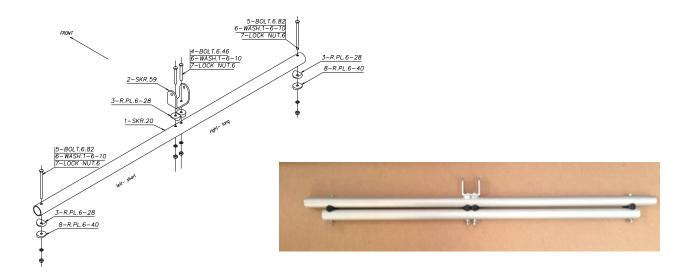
fuel tank support / flap handle mount - ,M version left and LS version on right.
